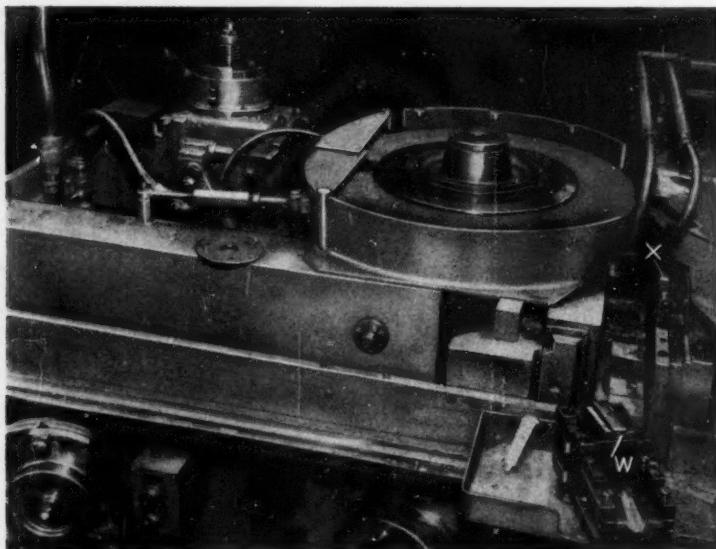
Close-up View of the Ex-Cell-O Machine for Root Grinding Operations, Showing One of the Grinding Wheels, which are Carried on Vertical Spindles, and the Diamond Dressing Unit at the Left
